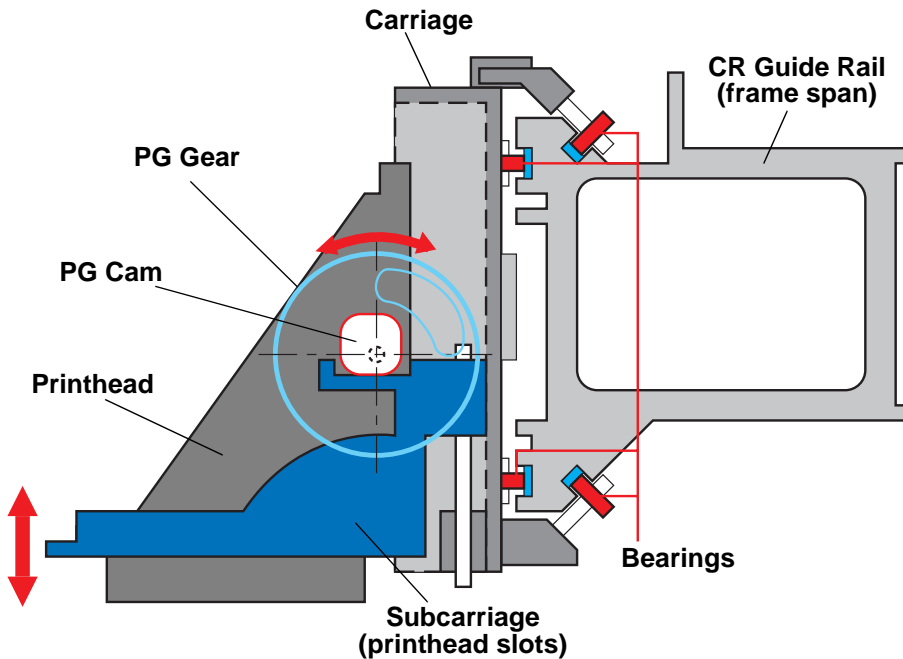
Carriage Mechanism & CR Guide Rail (side view)
